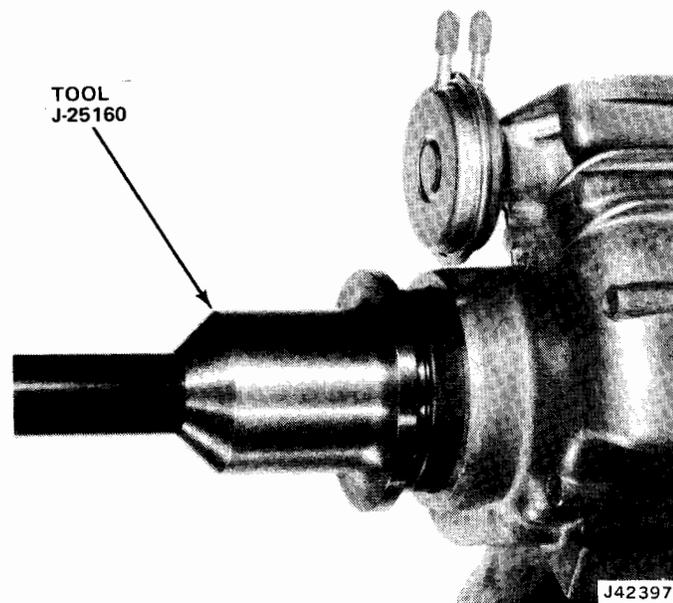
Installing Rear Output Shaft Oil Seal
